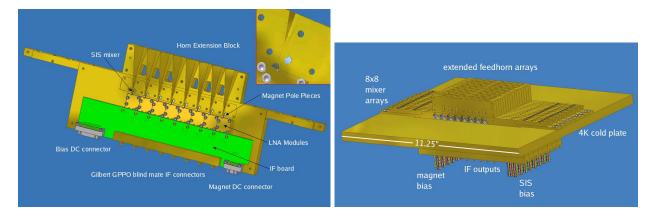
(left) 1x8 SuperCam mixer block exploded view. (right) Fully assembled focal plane array.
